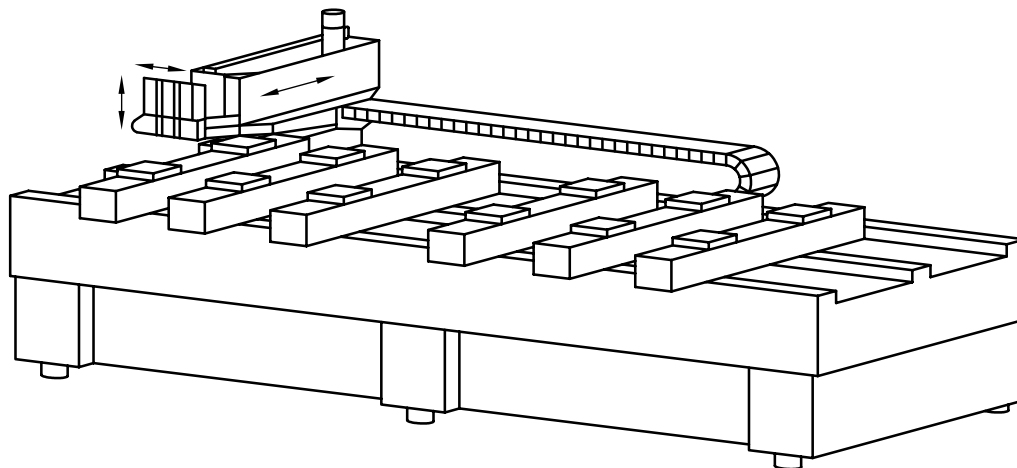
Example of a C frame machine with fixed table and moving machining head
